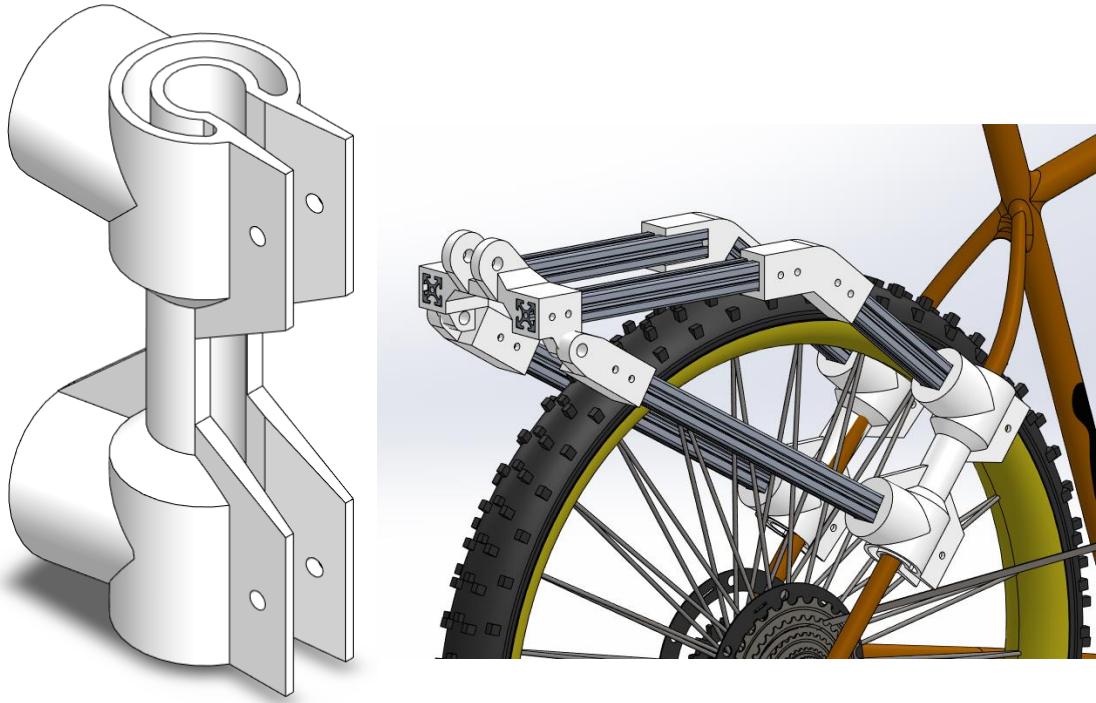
Mounting Part (left) and Mounting Bracket (right)
